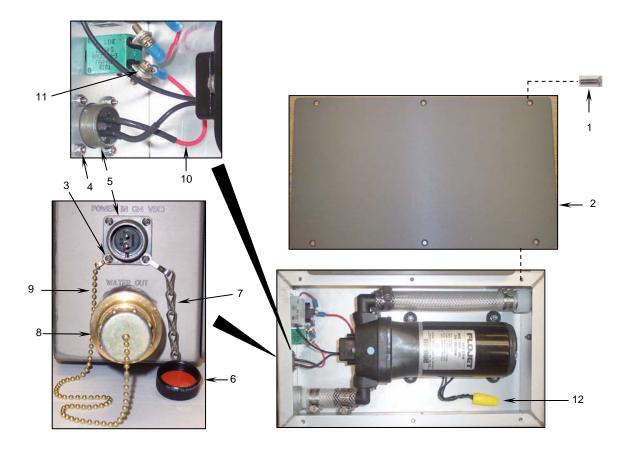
Removing the Sink Fill Pump Assembly Electrical Connector.
